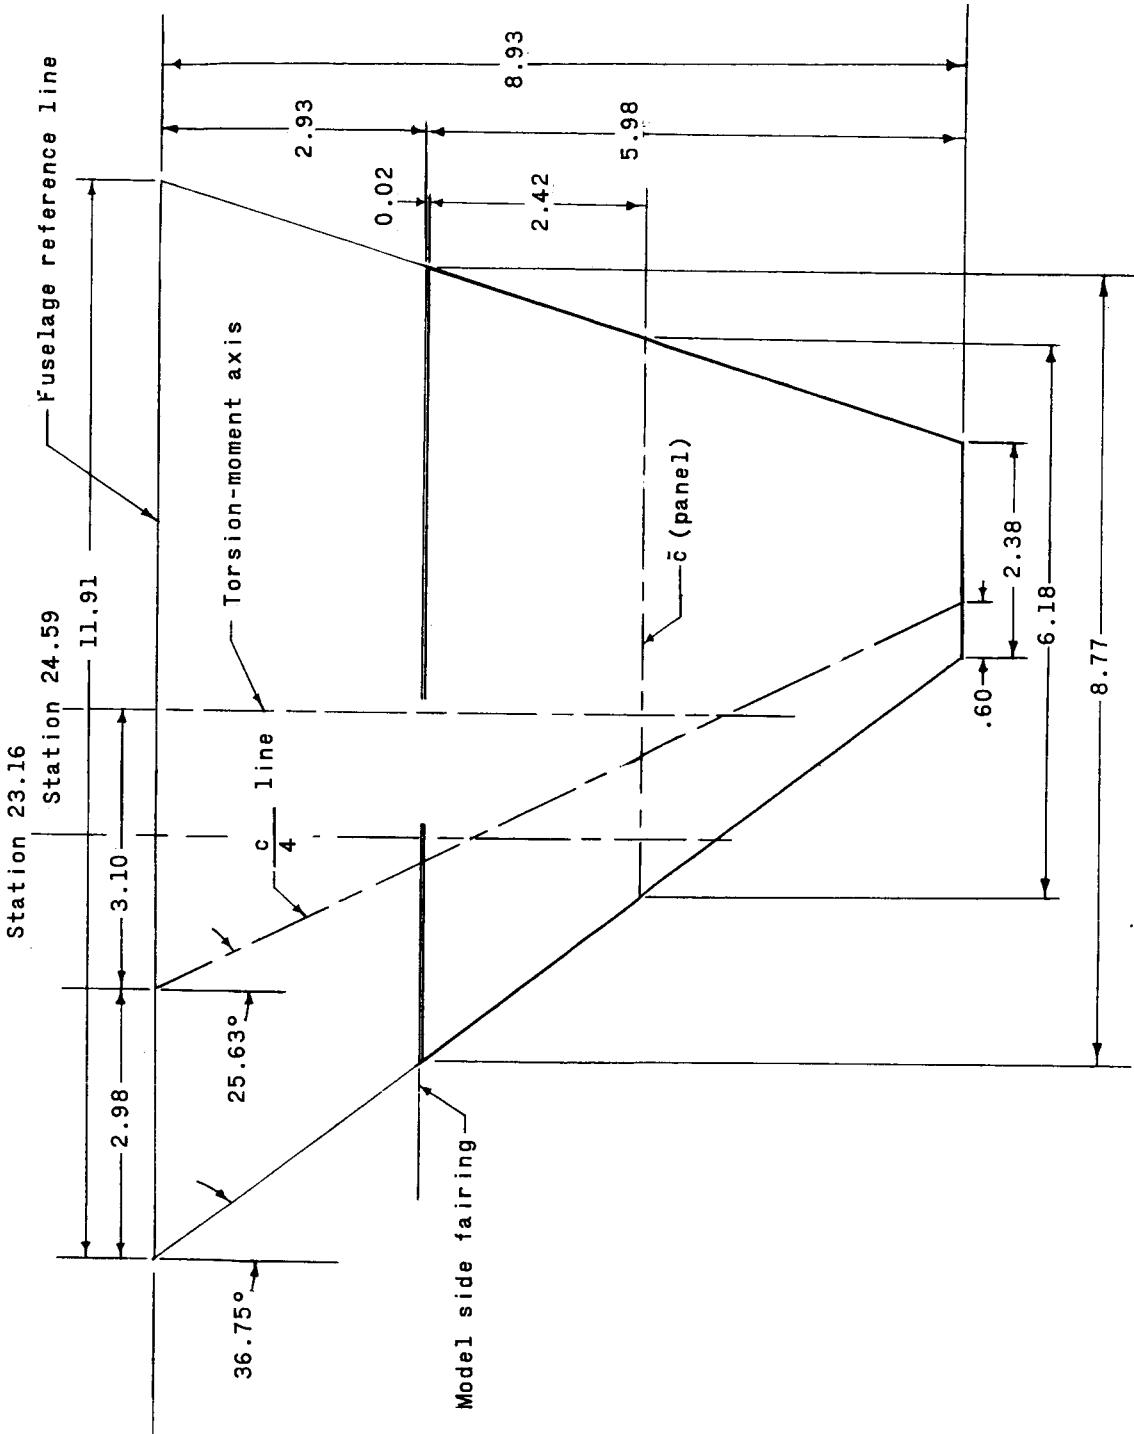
Drawing of the wing panel. Dimensions are in inches unless otherwise noted.
